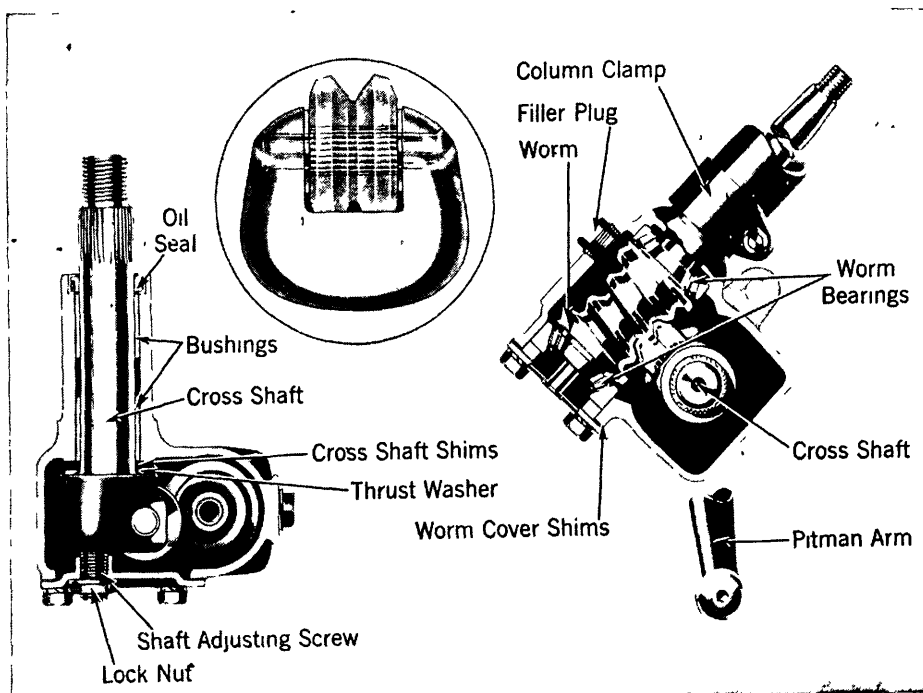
Gemmer worm and roller with internal mesh adjustment
